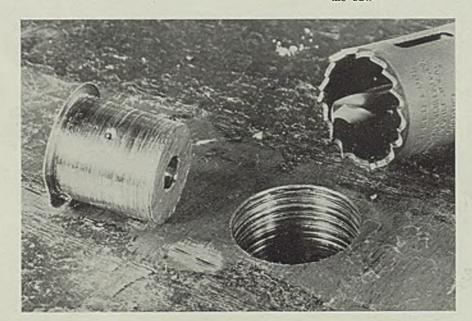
A large gas pocket and incomplete penetration condemn this weld. Trepanned plugs afford good checks, as illustrated here. Fig. 3 at right shows a sound weld in ½-inch plate
